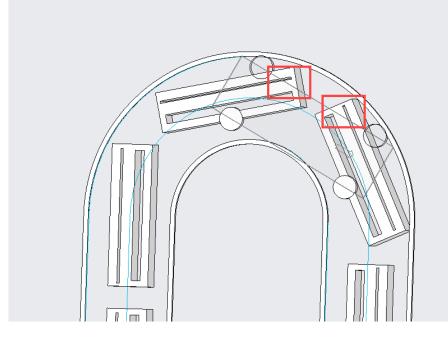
Magnet Array to QuickStick Motor Sensor Engagement
